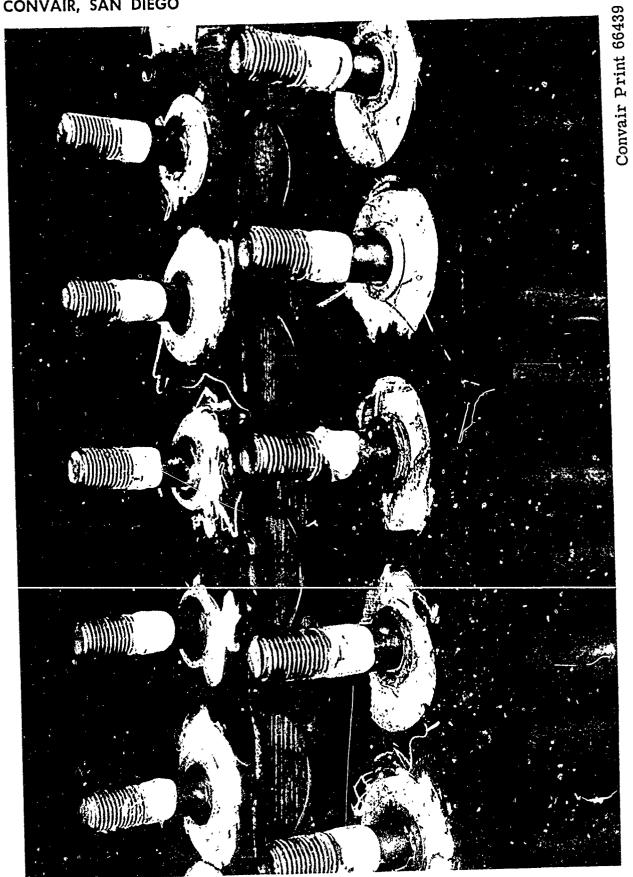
INSTALLATION FOR COMPRESSION TEST PANEL 29-01012 - Engineering Drawing 30489
